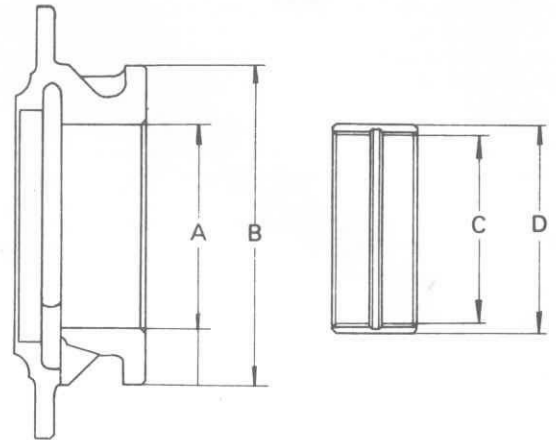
23 Tolerances on diameters and bores of main bearing and its support at the timing gear end of the crankshaft
